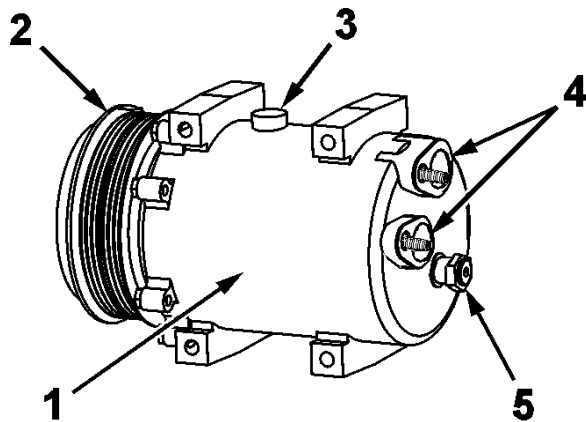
Typical Seven-Cylinder Sanden Compressor and Clutch (Version with 'Peanut' Style Fittings Shown)
